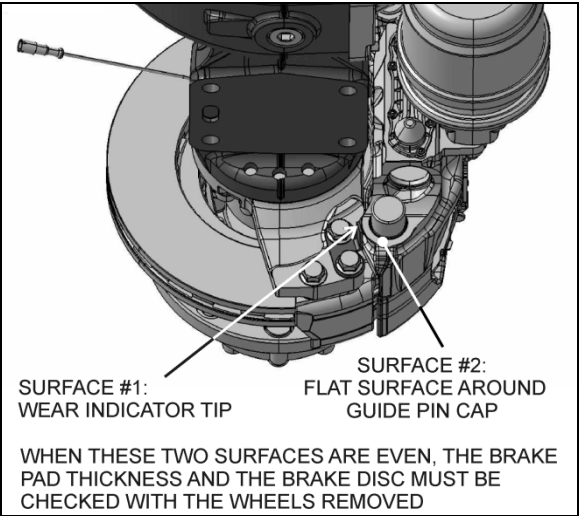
BRAKE PAD WEAR CHECK ON DRIVE AXLE
